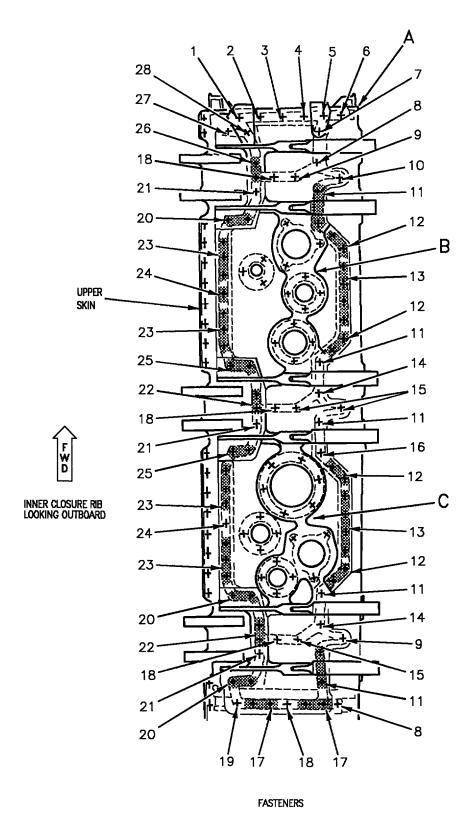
Inner Closure Rib Fasteners and Repair Fasteners (Sheet 1)
